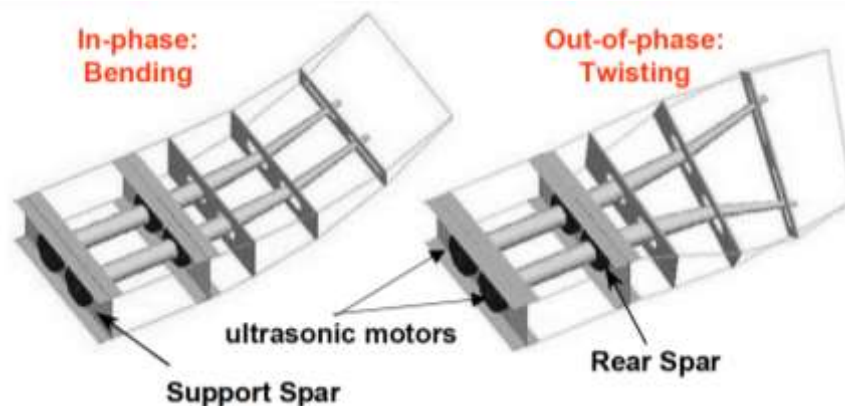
Ultrasonic motors driving eccentrotors to deform control surfaces [39]
